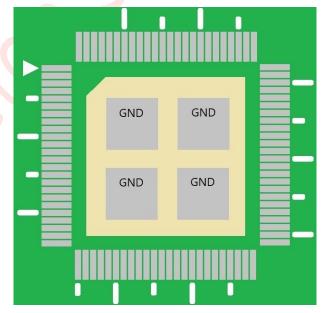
Design Suggestion-2 for LT7589A Bottom Pad PCB Layout
